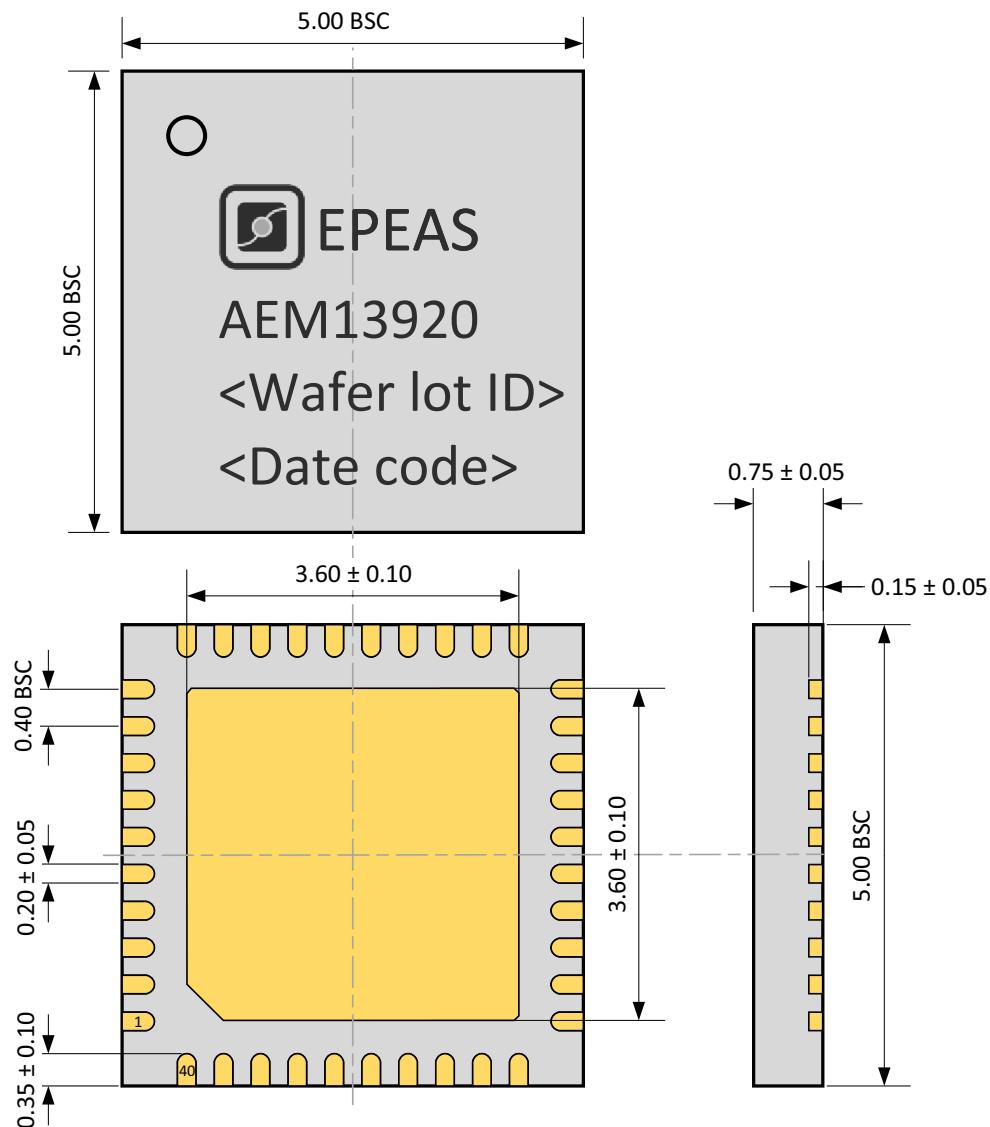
QFN 40-pin 5x5mm drawing (all dimensions in mm)
